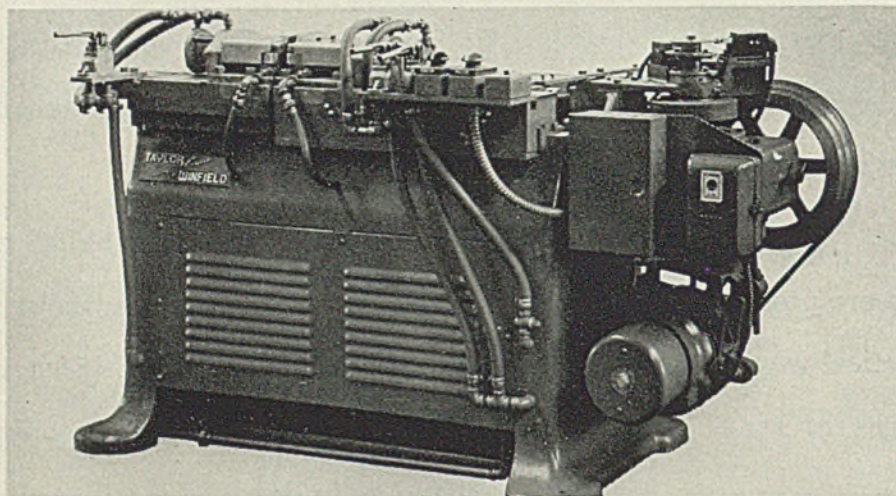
Taylor-Winfield type B-9 motor-driven butt-flash welder with hand controls and special air-operated clamping fixture used to weld parts shown in Fig. 2
